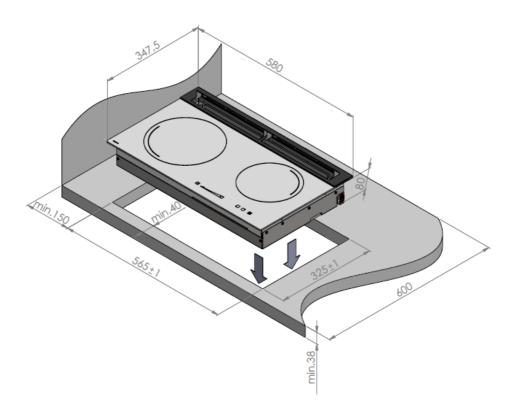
Dimensions and method of mounting the GPC Gen.2'5 2xH cooker
